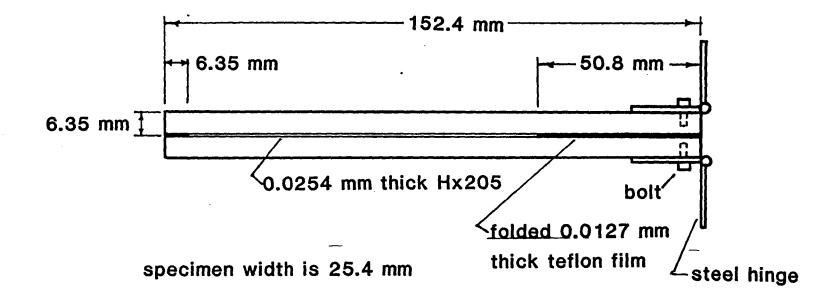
Double cantilever beam specimen with Hx205 resin used as an adhesive between aluminum adherends.
